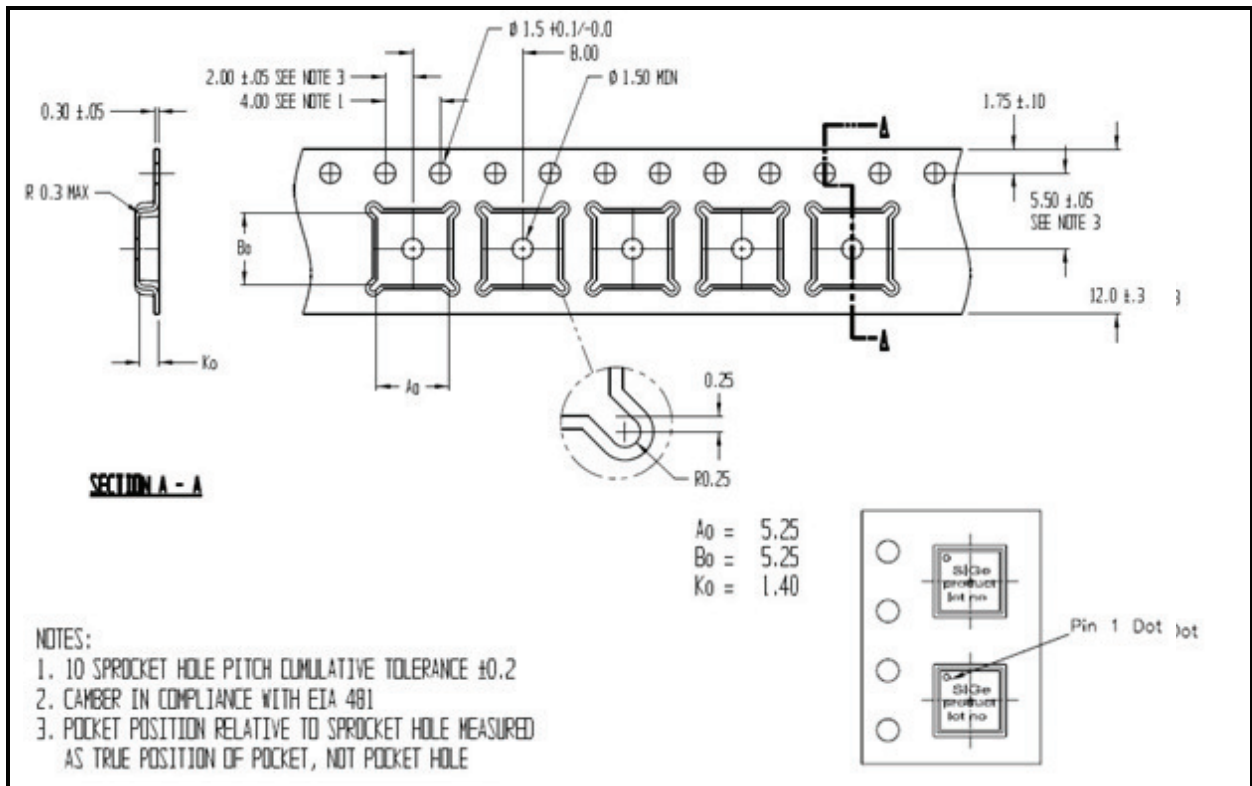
Detailed Tape and Reel Information (All dimensions in Millimeters)
